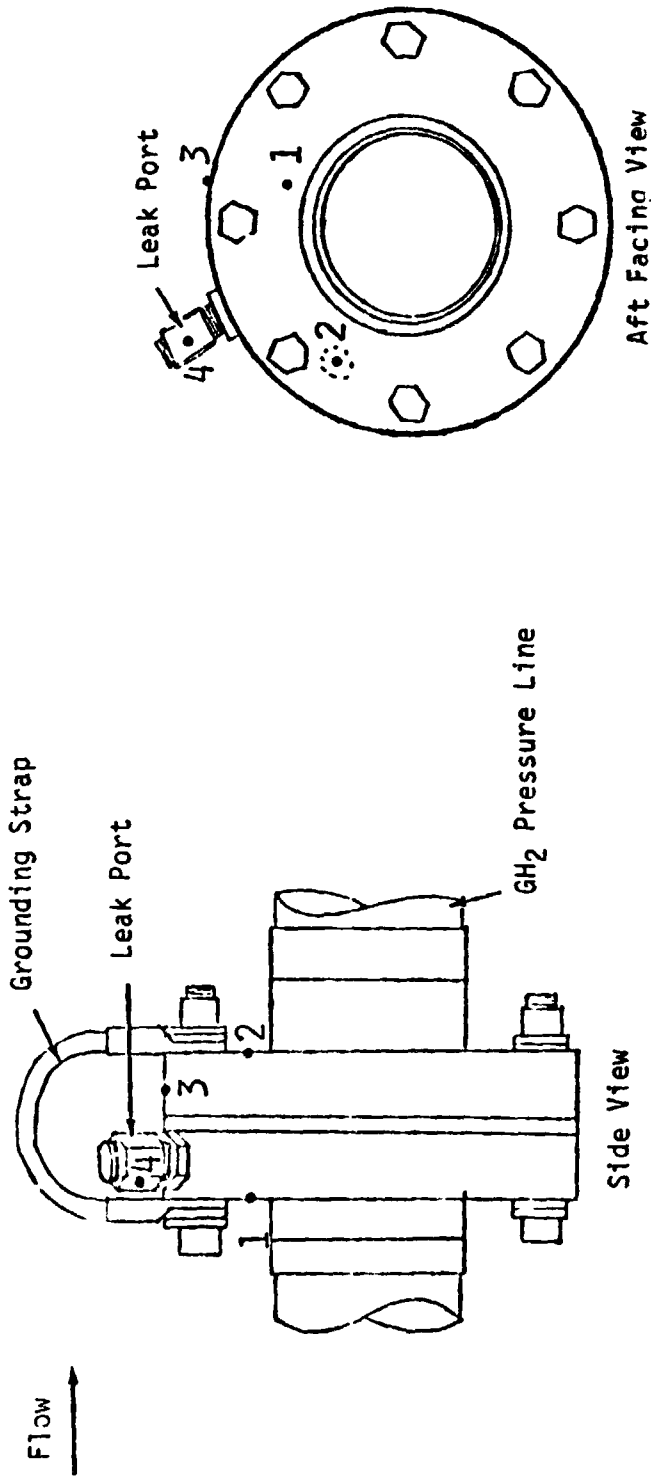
Typical Barry Mount to Fitting Grounding Strap
